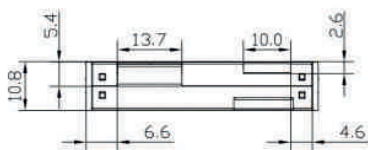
Dimension (Unit : mm, Tolerances : ISO2768-mK)
